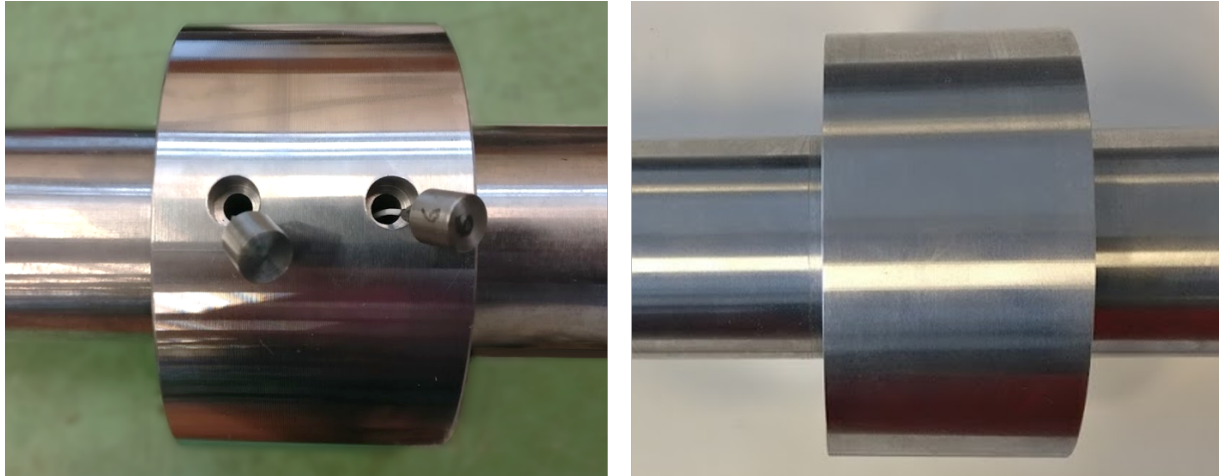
Photograph of shaft pin installation (left) and shaft after grinding (right).
